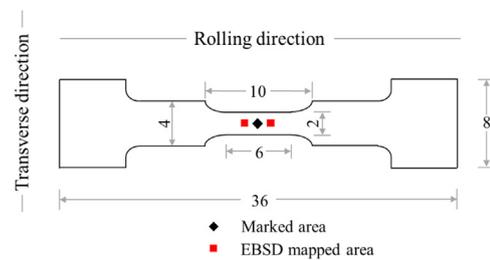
Schematic of the specimen used for tensile test and EBSD (dimensions are in mm).
